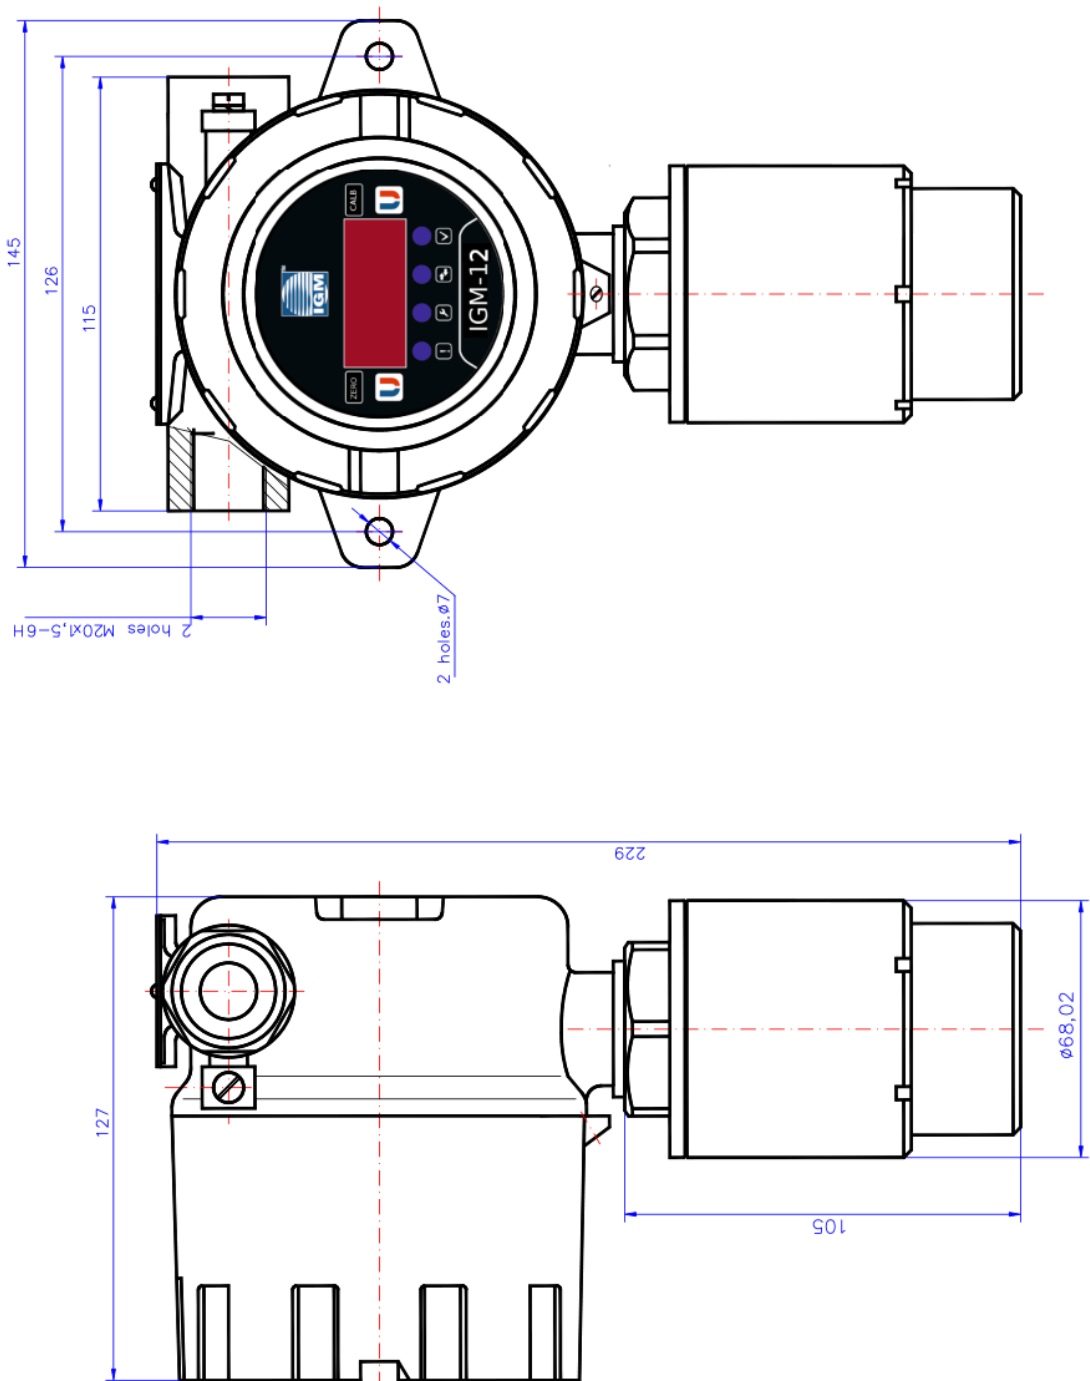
Explosion proof drawing of IGM-12 gas detector.
